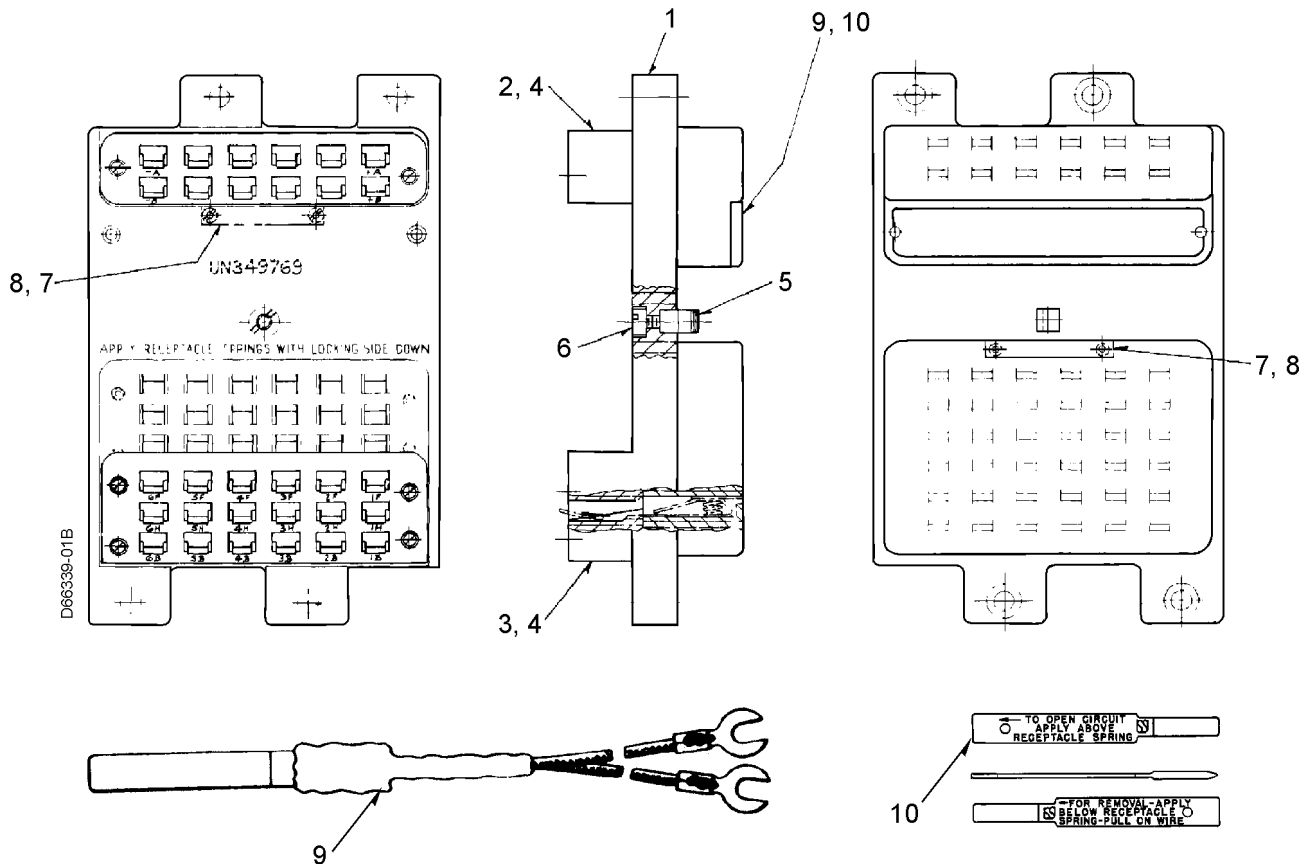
Old Style Mounting Base Assembly (N434647)
